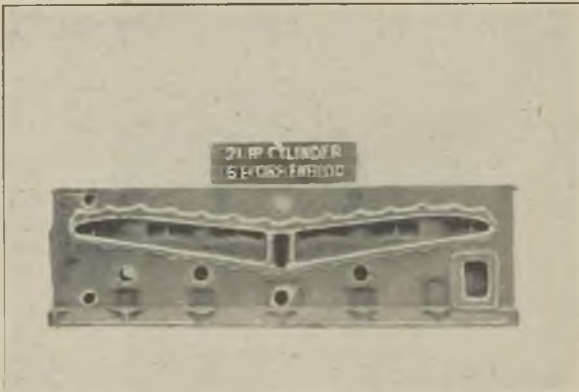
THE INDUCTION SIDE OF THE SAME CASTING.
